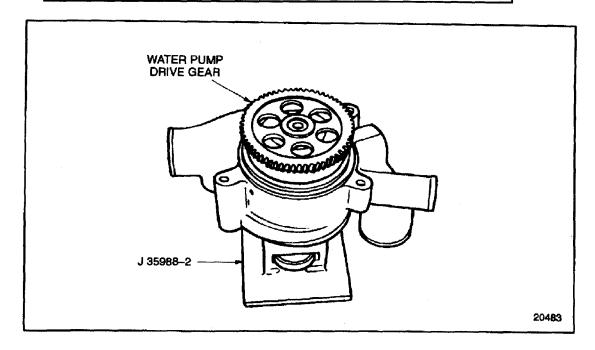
Water Pump Drive Gear Installation (GCM)
